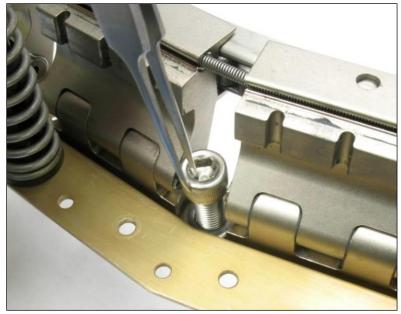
Inserting a SHC screw between Leaves on Lower Ring.
